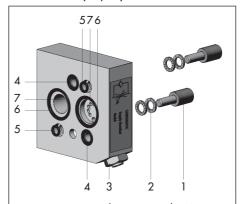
Fastening the restrictor plate (restrictor plate 100182988 shown)
